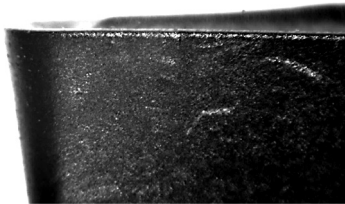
The cutting edge of a new insert VCMT 160404-SM
